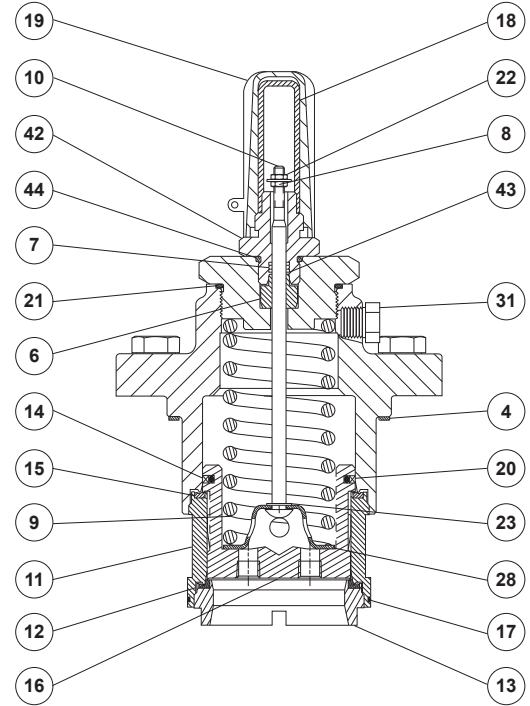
Type 63EG Main Valve without Travel Indicator Assembly
